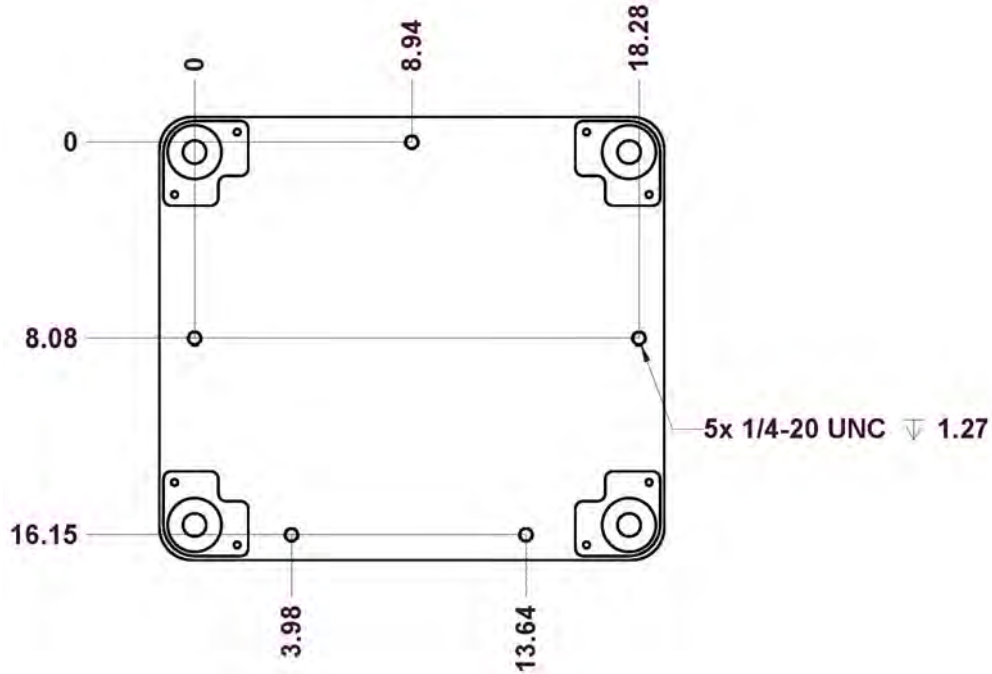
RG-1 Mounting Holes (unit: cm)
